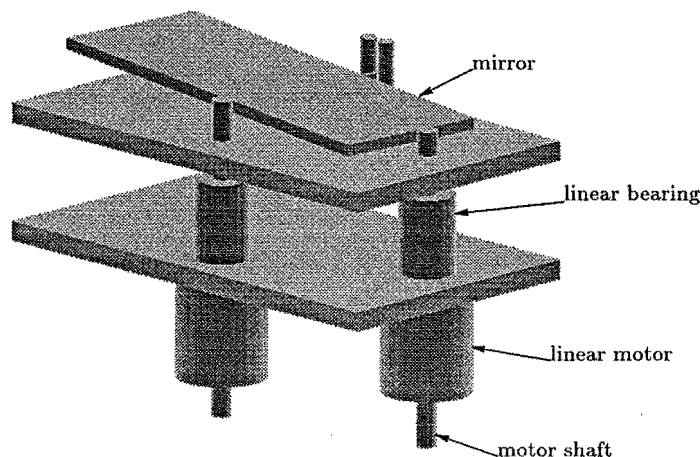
Schematic diagram of the scanning mirror drive mechanism. On two parallel aluminium plates the linear motors, linear bearings and mirror are mounted. Movement of the shaft in either motor causes the orientation of the mirror to change.
